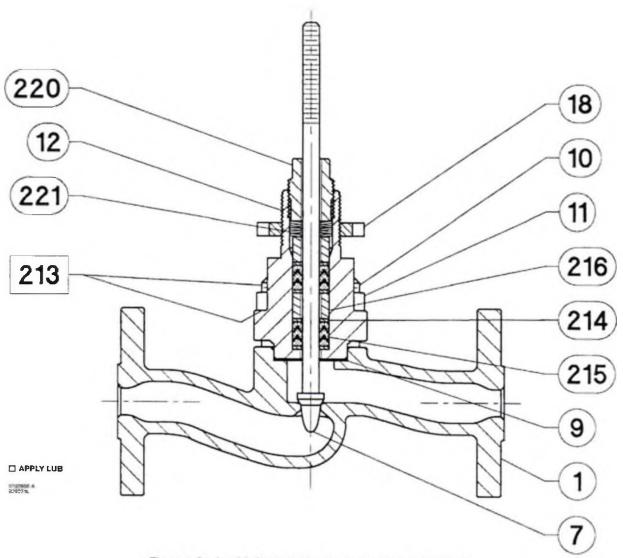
Design CP Control Valve Assembly (0.5 and 0.75 Inch)
